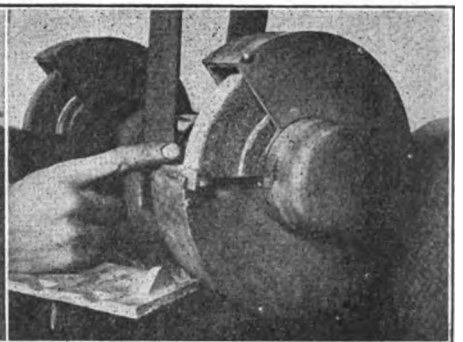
THE FACE OF A WHEEL SOMETIMES BECOMES GLAZED AND LOADED
